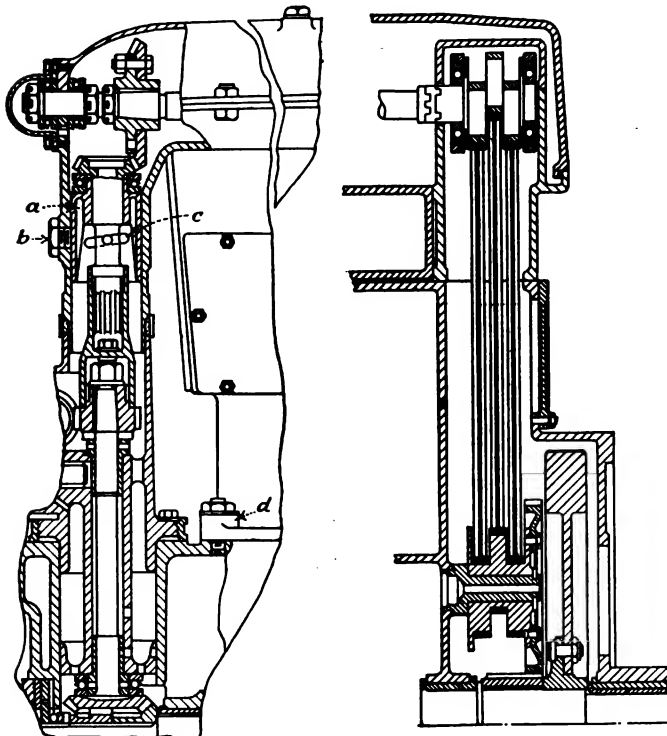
AT THE LEFT THE CAMSHAFT DRIVE USED ON THE BENTLEY ENGINE AND AT THE RIGHT A SOMEWHAT UNUSUAL FORM OF CAMSHAFT DRIVE THAT IS USED ON THE LEYLAND STRAIGHT-EIGHT ENGINE
